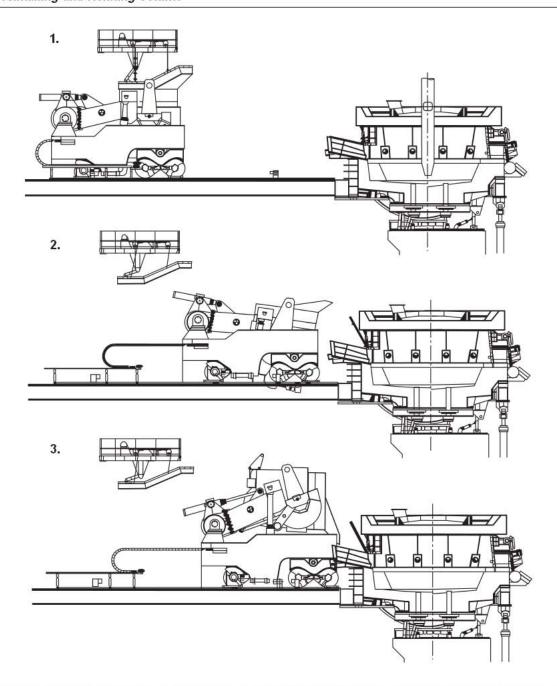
Operating sequence to charge hot metal. 1. Ladle with cover in place. 2. Cover removed and ladle to furnace. 3. Charging hot metal. (*Courtesy of Paul Wurth*, *S.A.*)
